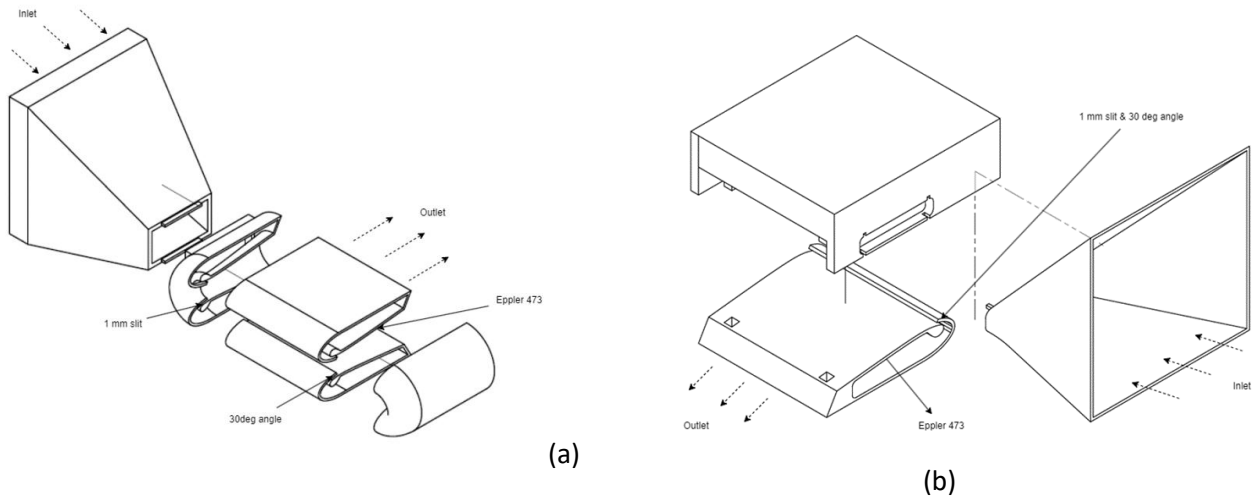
Assembly (a) Design 1 assembly for experimental data collection (b) Design 2 assembly for experimental data collection
